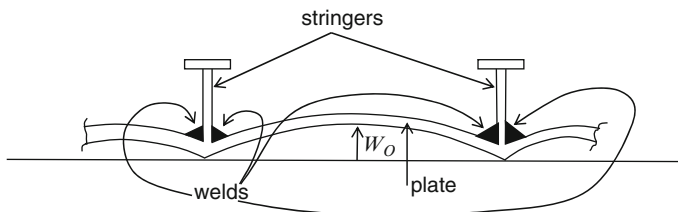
Initial imperfections in fillet welded plates (plate welded to stringers)
